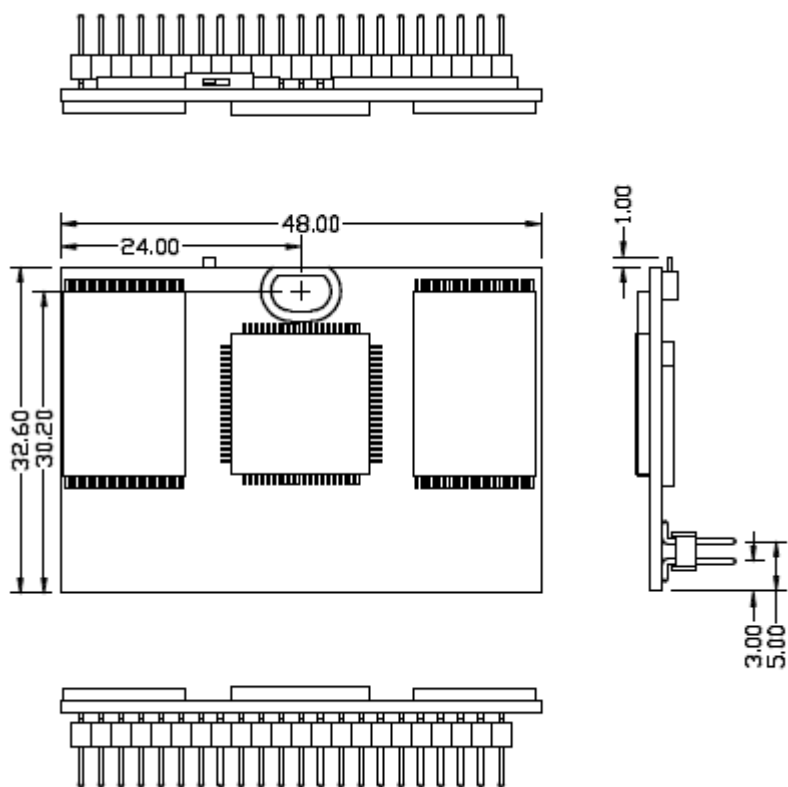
Mechanical Dimension of EDC4000 44-pin (Horizontal Male Type C)
